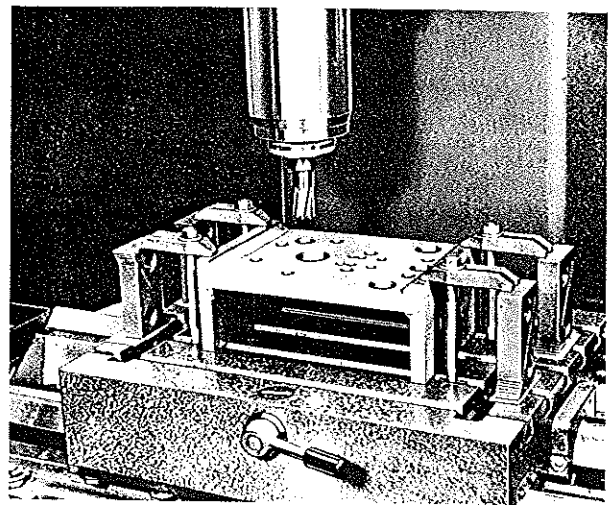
Jig boring reamer. Courtesy Kearney and Trecker.
